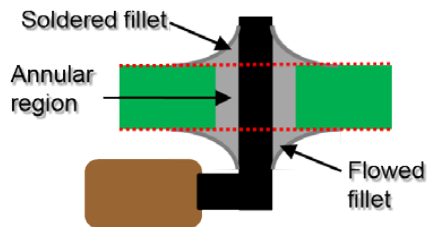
Drawing of the three regions of a solder joint: the soldered fillet, where heat and solder are applied, the annular region within the circuit board through-hole, and the flowed fillet near the resistor.
